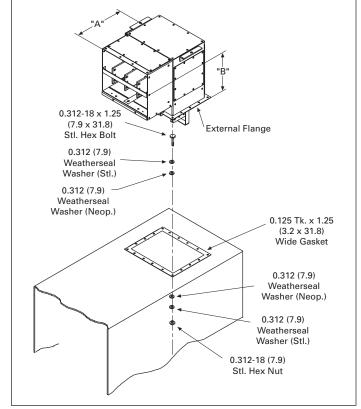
Medium-Voltage Switchgear Flange (External Flange)
